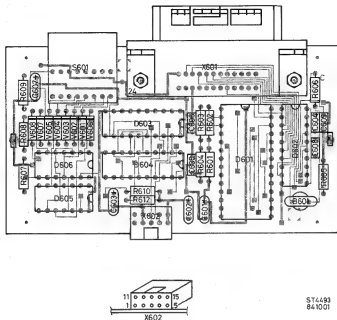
IEC-625/IEEE-488 Interface pcb, lay-out component side
